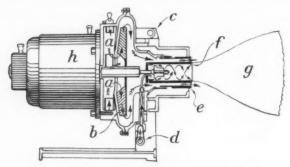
HORIZONTAL ROTATING-CUP OIL BURNER
